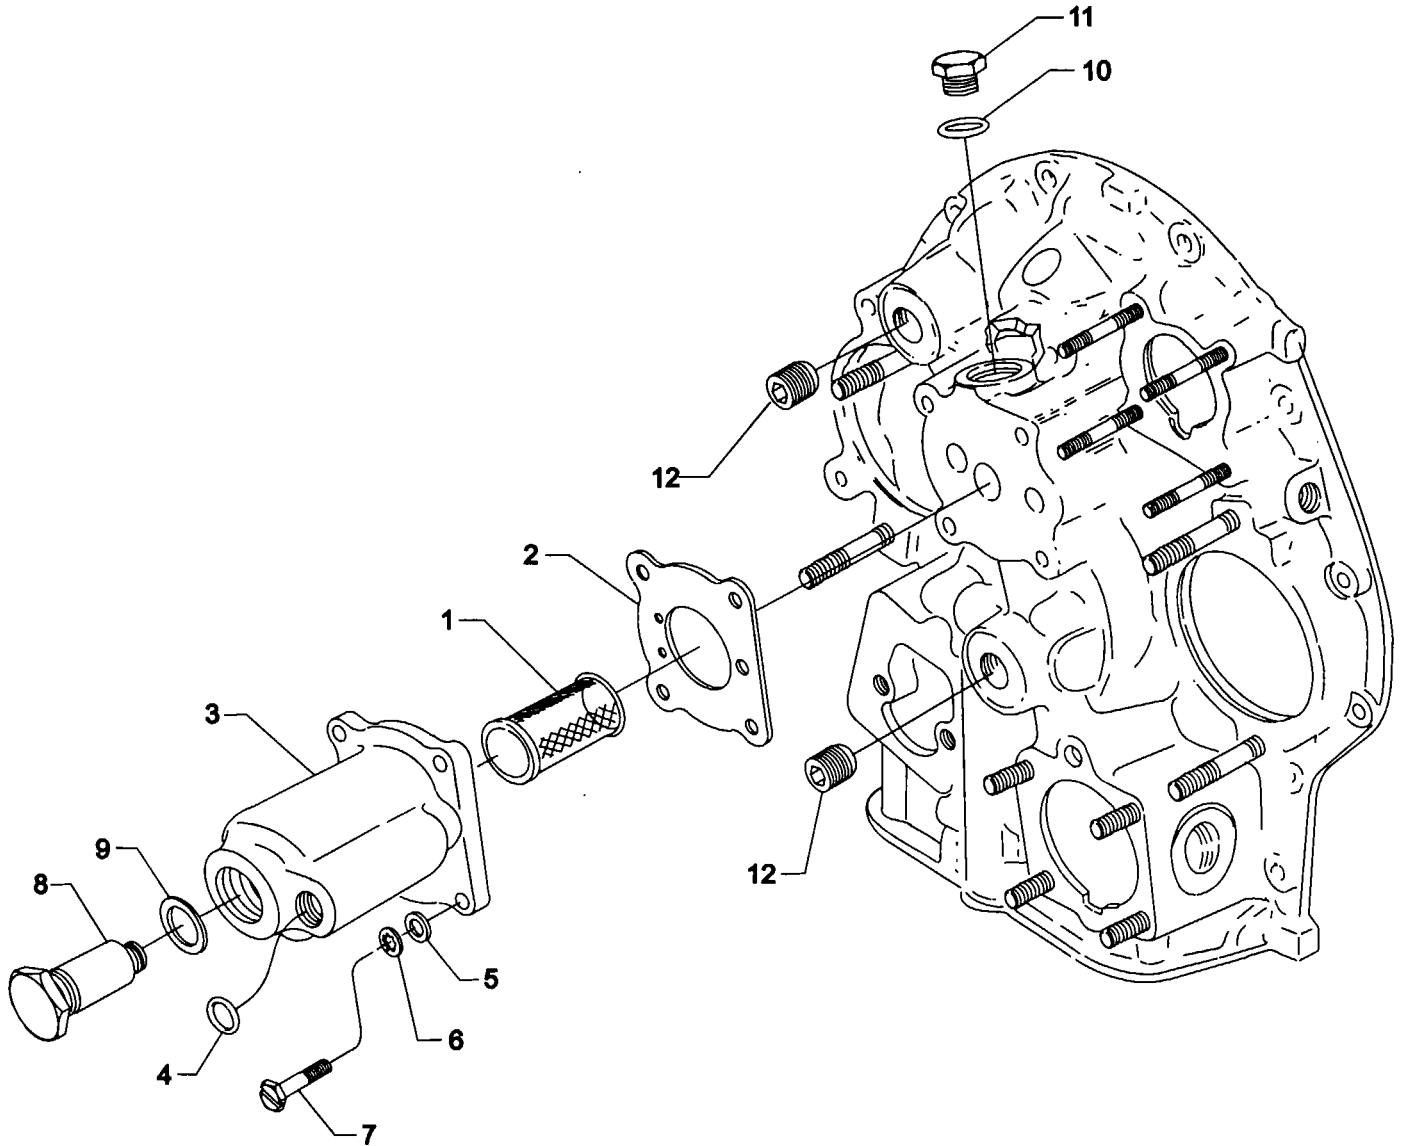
OIL FILTER ASSEMBLY AND OIL COOLER BYPASS VALVE
